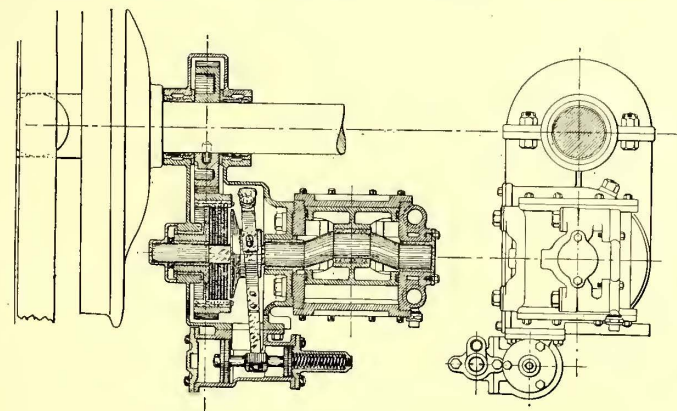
SECTION AND SIDE ELEVATION OF PUMP
